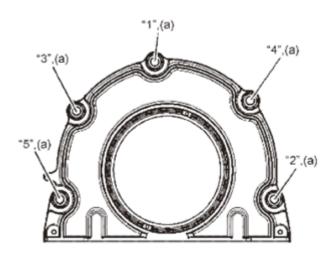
Identifying Oil Seal Housing Bolt Tightening Sequence Courtesy of SUZUKI OF AMERICA CORP.
